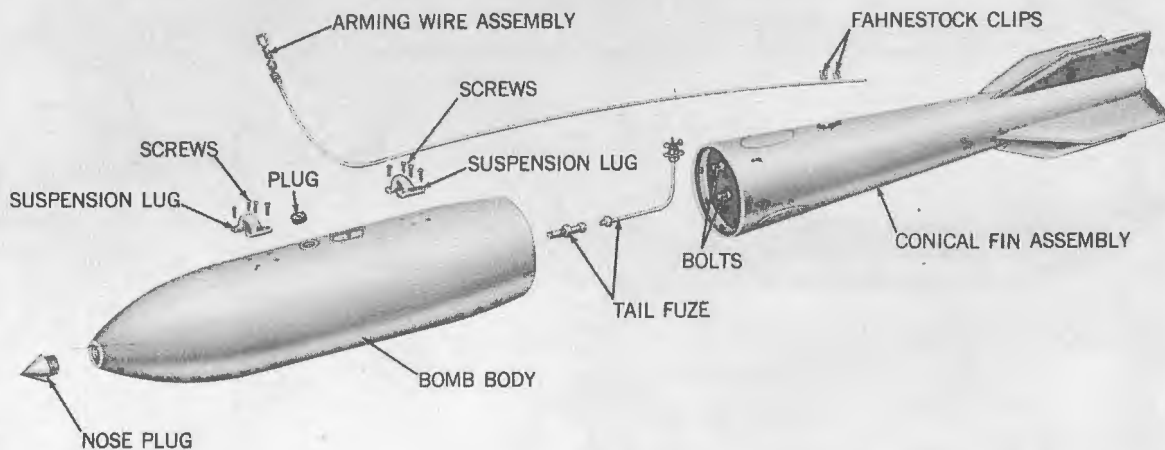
3000-lb Demolition Bomb M118 (Mechanically Fuzed), Exploded View.
